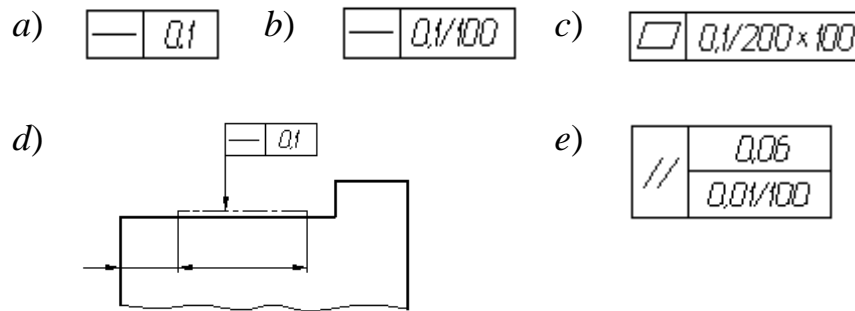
Is examples of filling the second frame graph depending on the size of the surface covered by the tolerance
